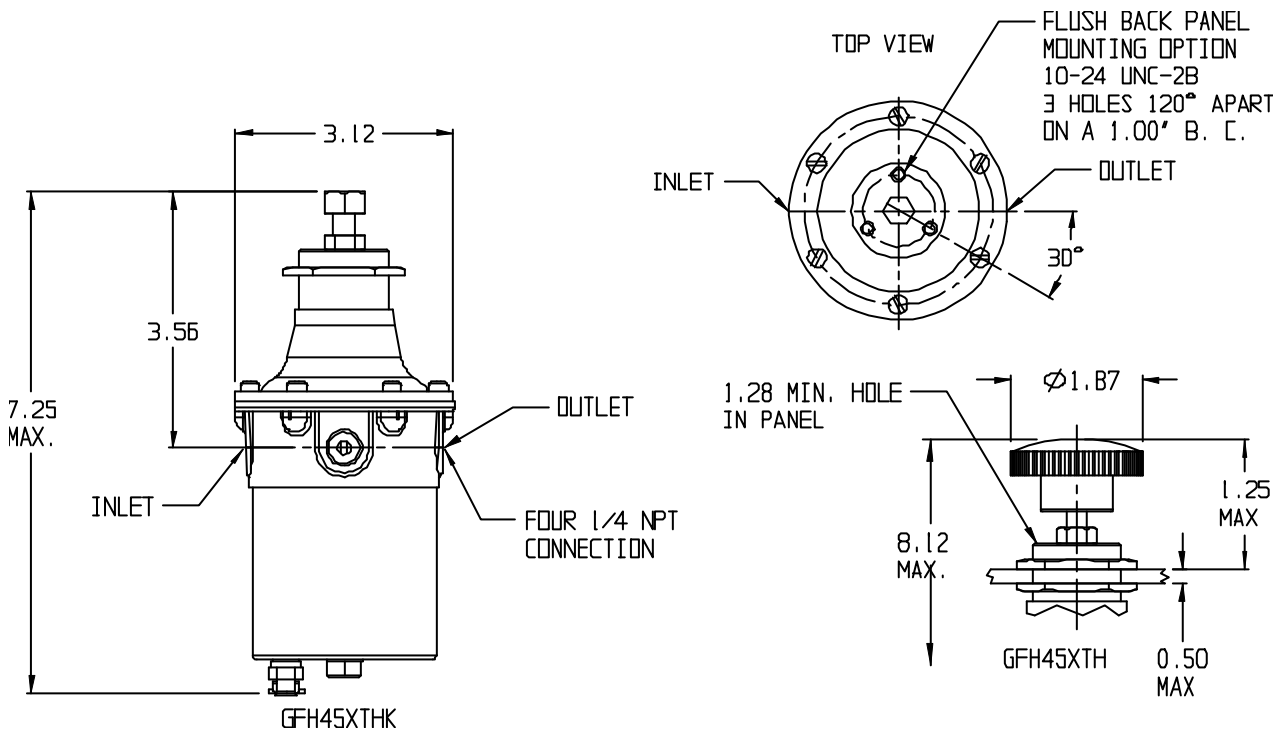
Regulator dimensions with 1/4" NPT connections. For certified dimensional drawing, see A17-83.
